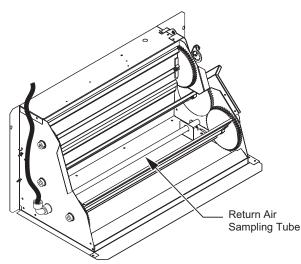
Return Air Sampling Tube Location (View reoriented to show opposite side for clarity.)
